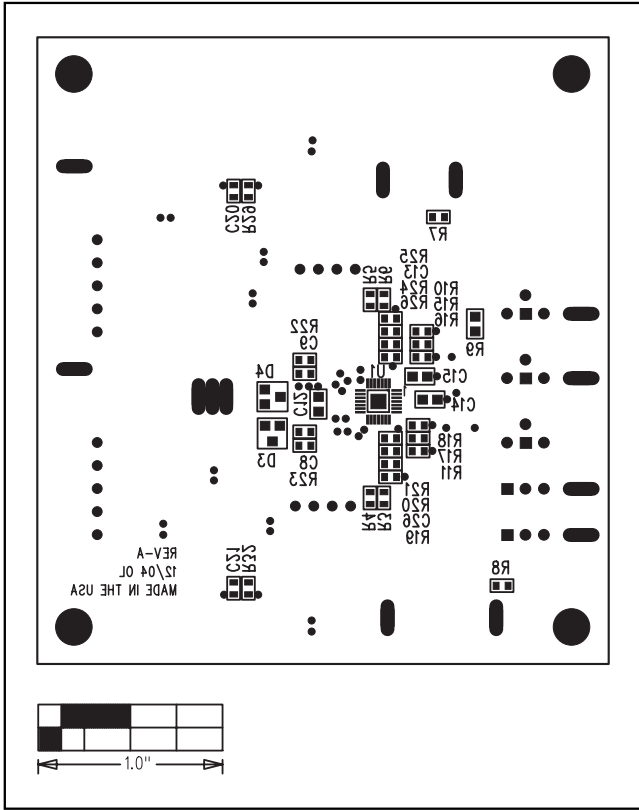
MAX8717 EV Kit PC Board Layout—Bottom Silkscreen
